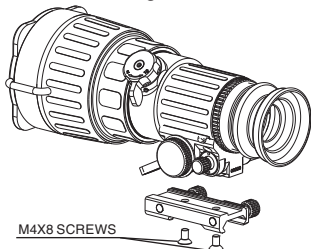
ASSEMBLING PS-22 WITH 7/8" WEAVER MOUNT
